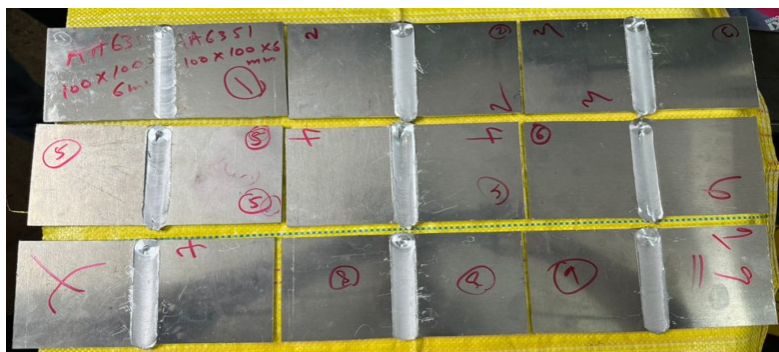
Photograph of fabricated FSW joints according to Taguchi design matrix
